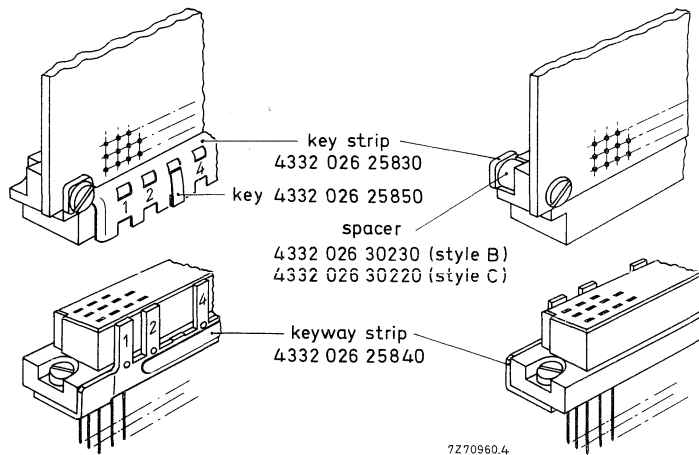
Coding parts; key strip mounted to solder side of printed board.
